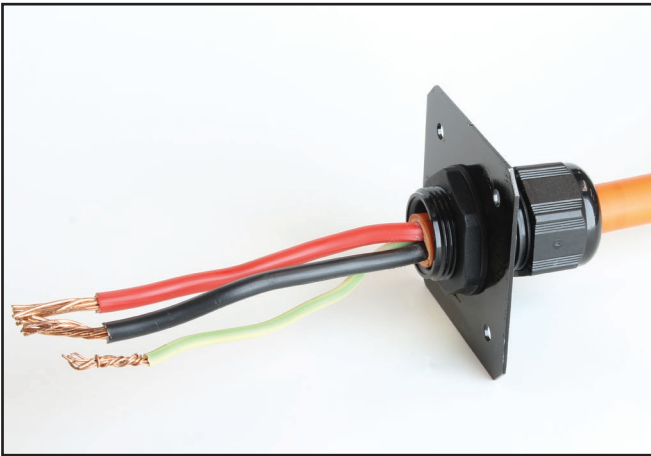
Pre-assembling the Cable, Gland, Gland Plate and Mounting Gasket
